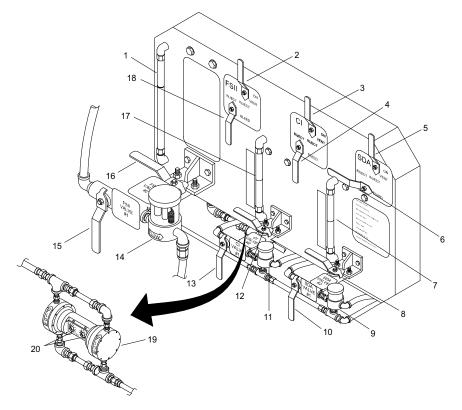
Fuel Additive Injector Assembly Controls and Indicators (Sheet 1 of 3).
